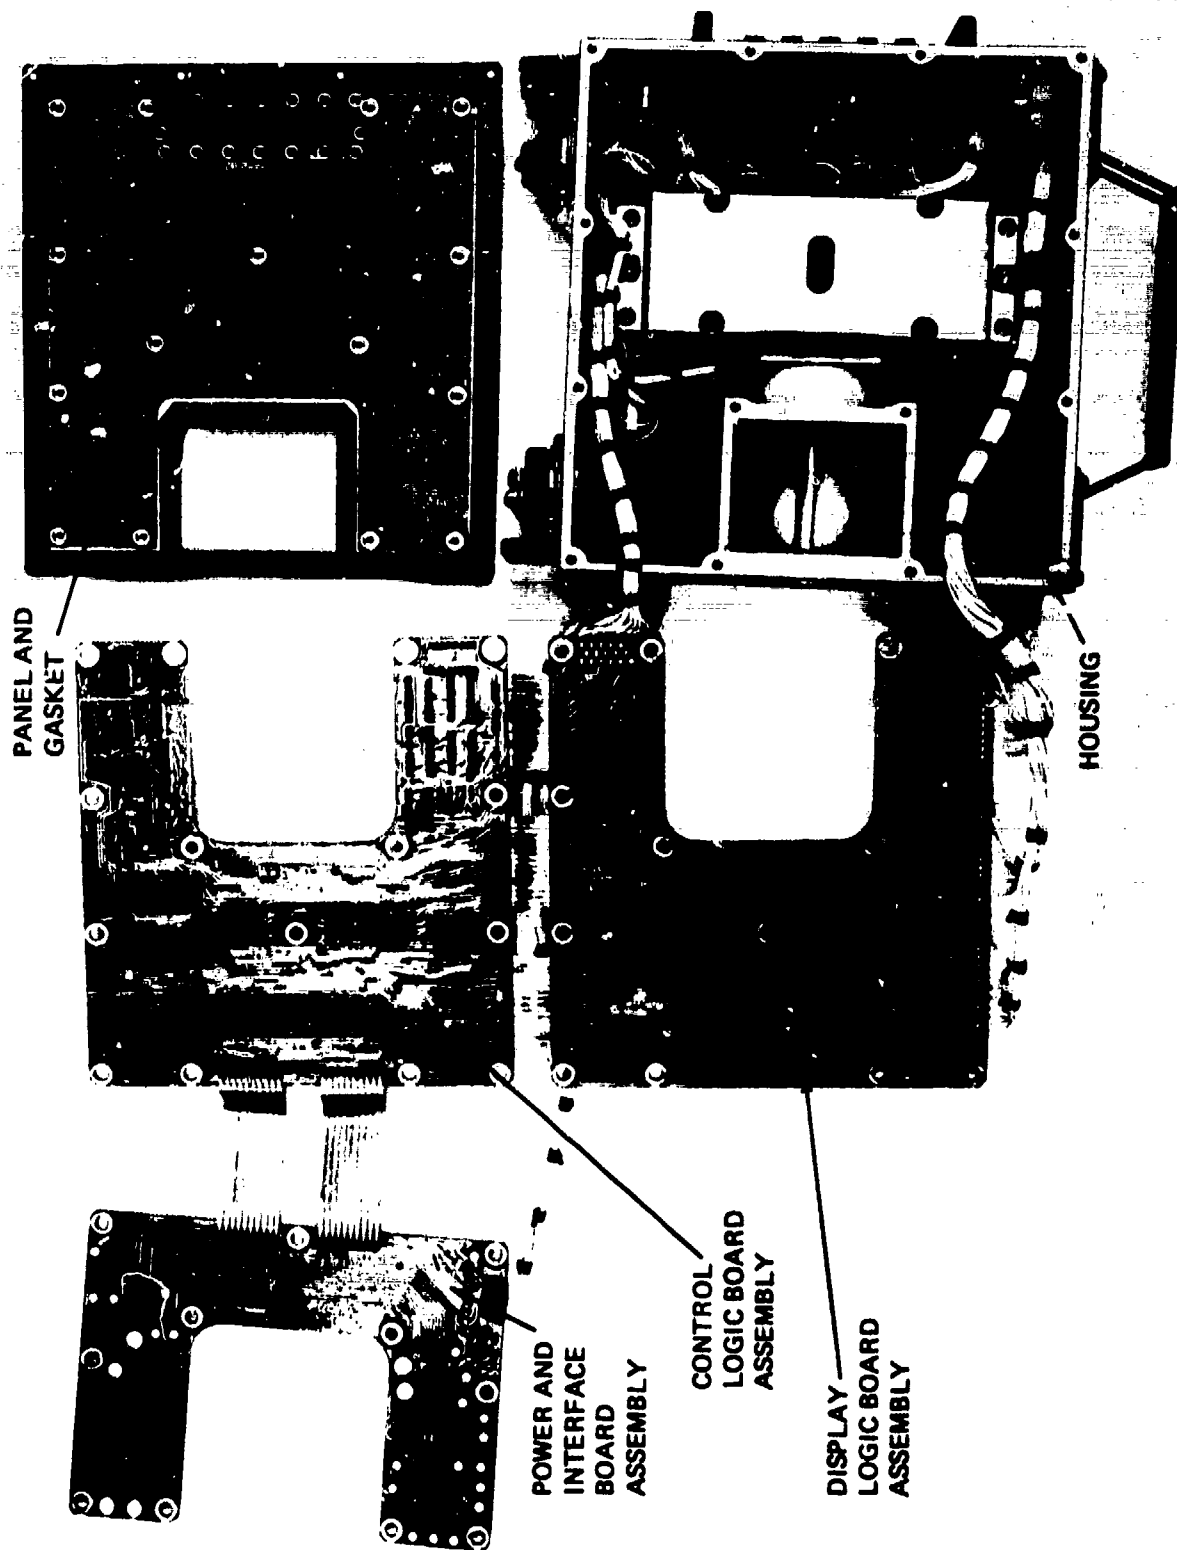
XM36E1 FUZE SETTER WITH PANEL REMOVED - TOP VIEW
